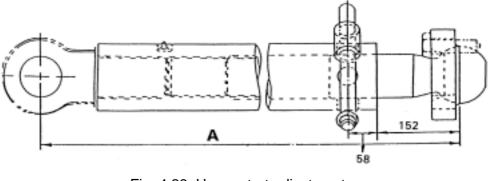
Upper strut adjustment A = 1332 - Fully shortened A = 1434 - Fully extended
